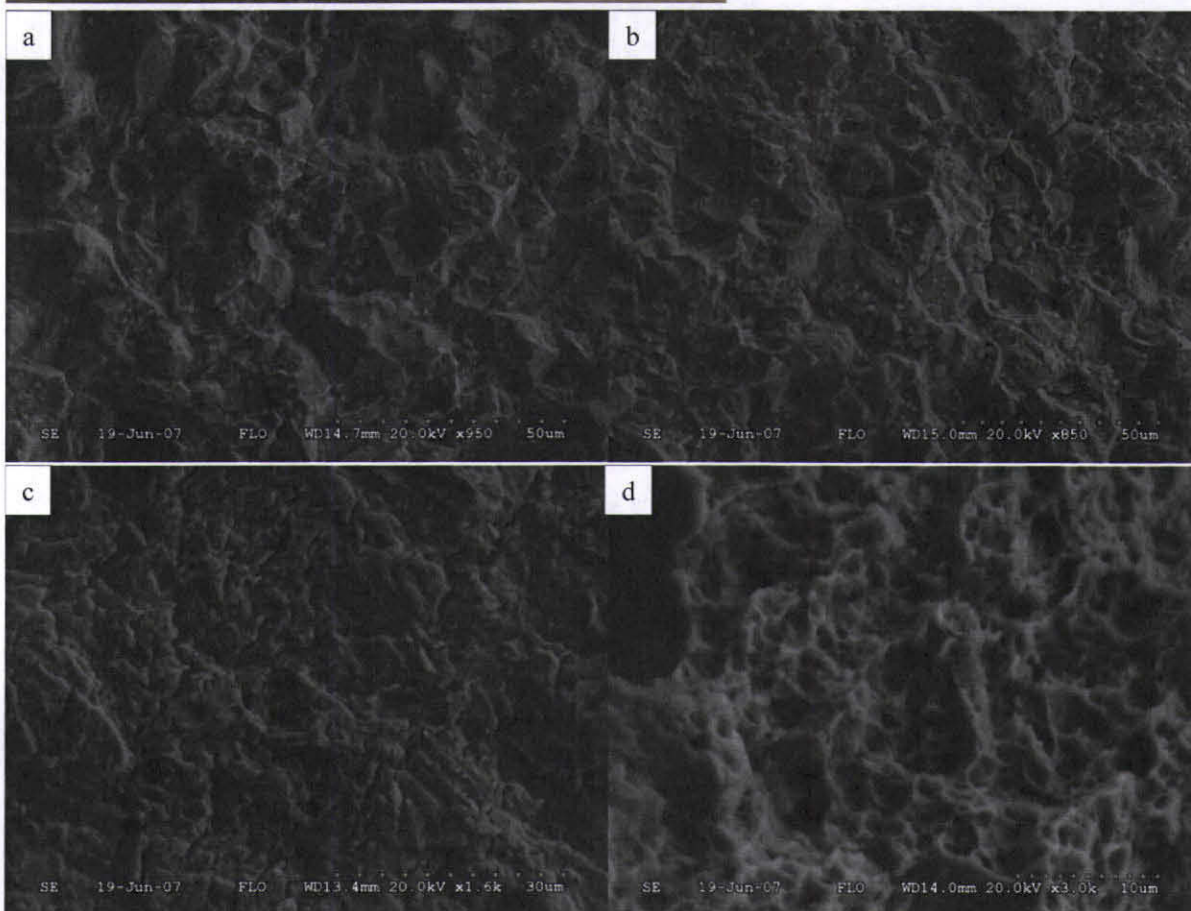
Representative pictures from fracture surface Bolt 6.
